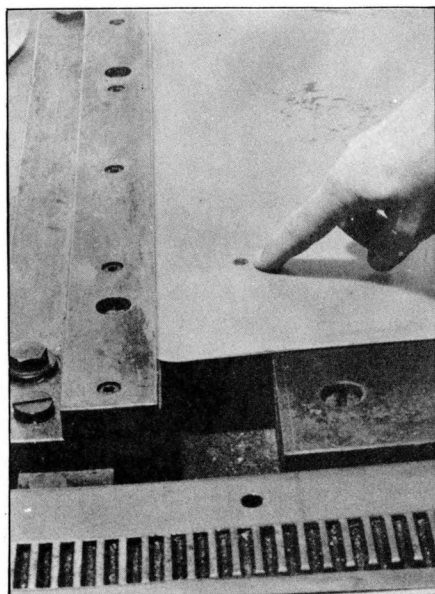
The hand shows that the top disc of the bolt has entered the hole of the plate. Then the plate-fastening part (the bar with the hexagonal holes) is screwed tight.
